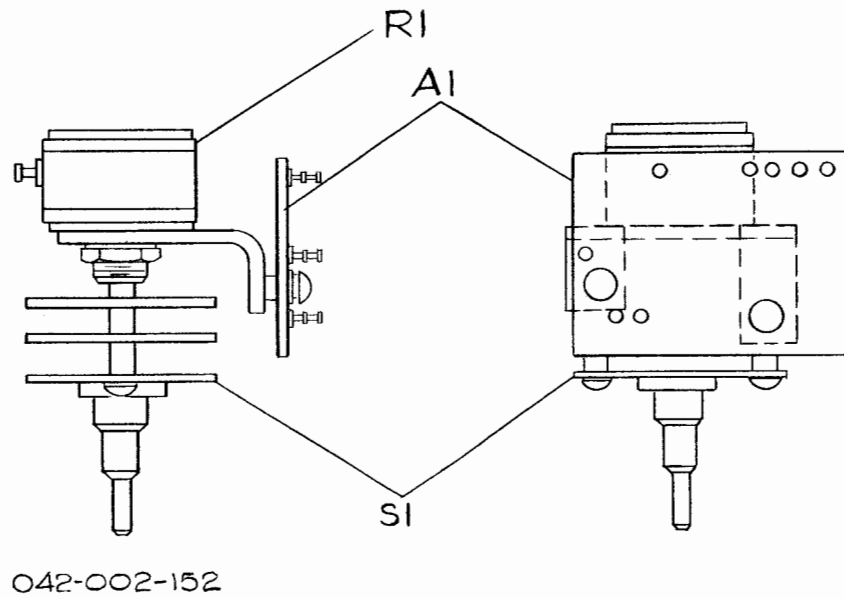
100-Hz Control and Vernier Assembly A2A11
